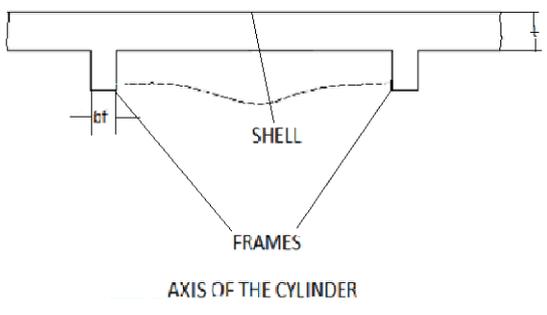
Cross section of Ring Stiffened cylindrical shell
